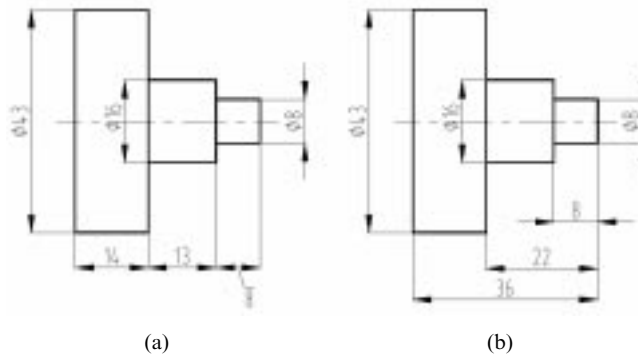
(a) Geometric dimensioning; (b) production-oriented dimensioned.
